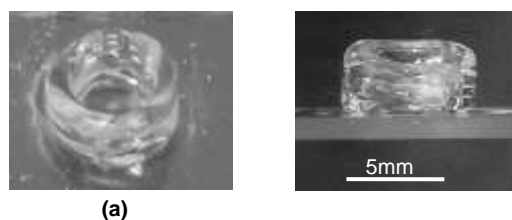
Photos of the printed fused quartz cylinder: (a) oblique view (b) side view
